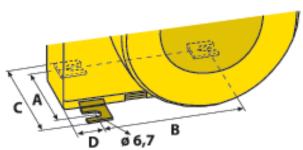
Screw Mounting with Mounting Brackets (diagonal)
